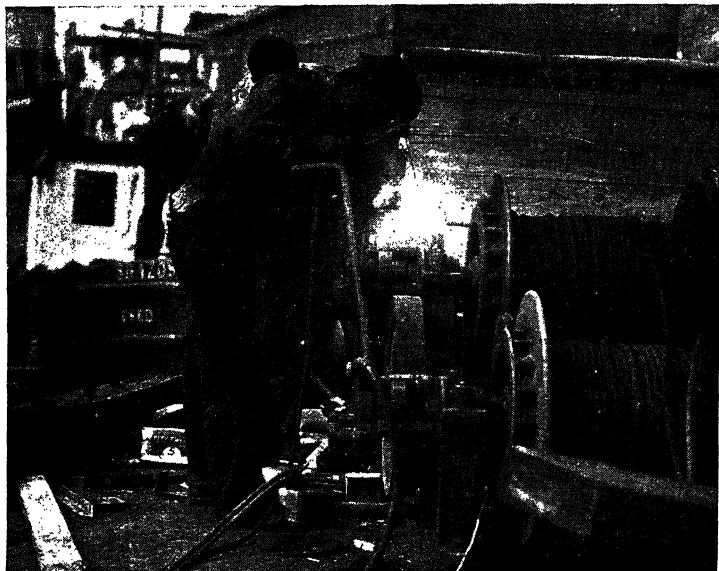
Cast-iron repair by arc welding. (*Courtesy of Lincoln Electric Co.*)
